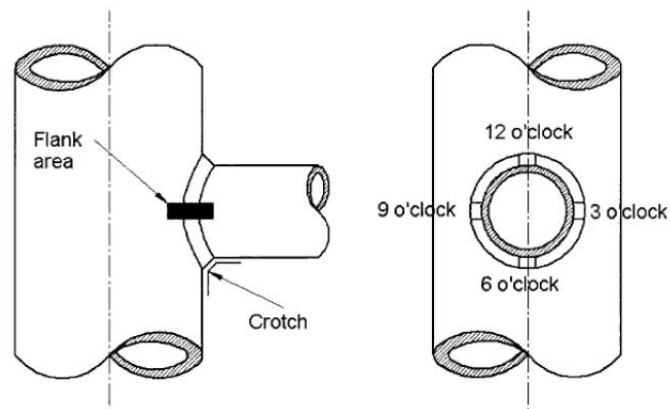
Typical Branch, Stub & Attachment Weld positions to be replicated.
